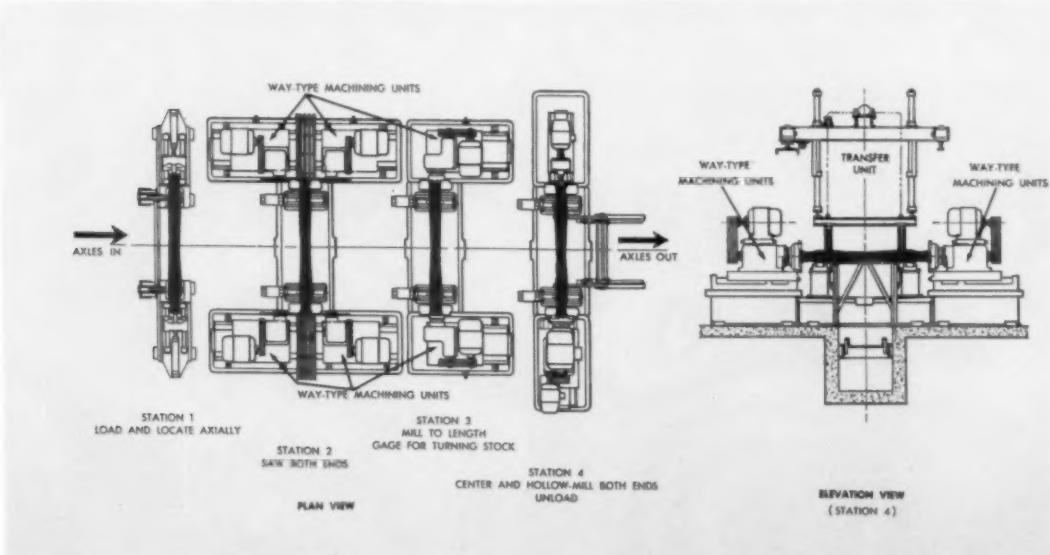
Line type cutoff and centering machine for railroad car axles.
